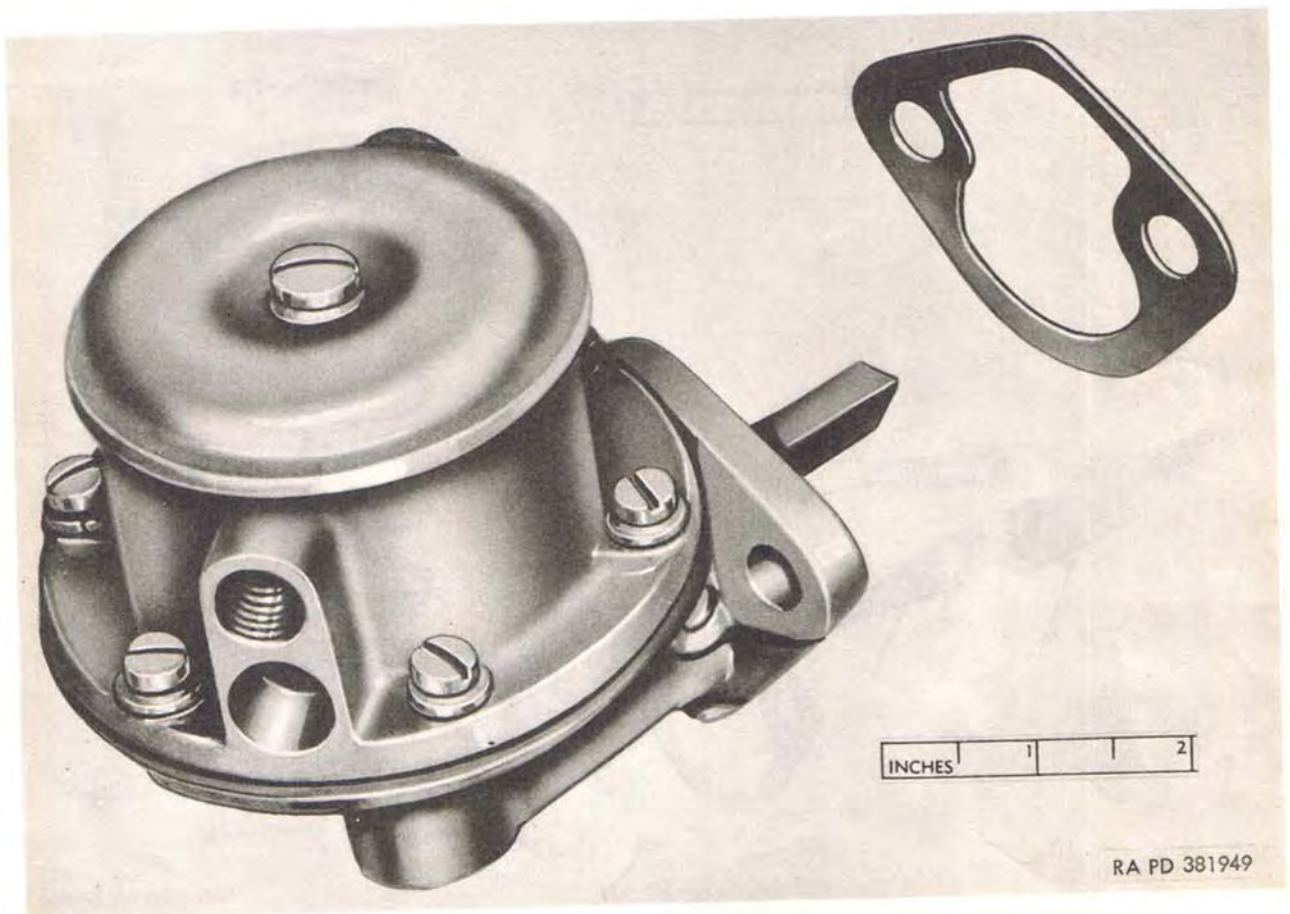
Fuel Pump, Assembly - 2910-587-1430
